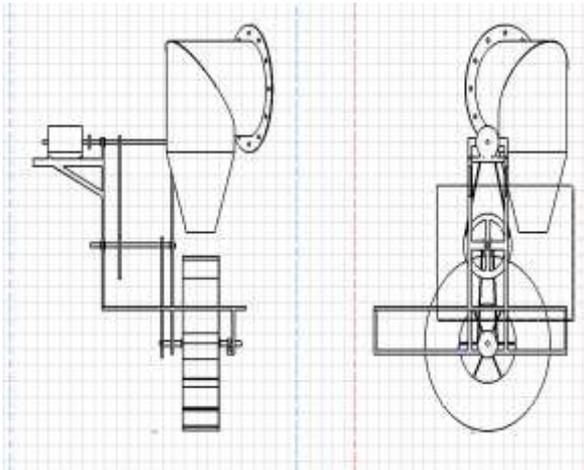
Left hand side view and Front view of open type low head Water wheel turbine.
